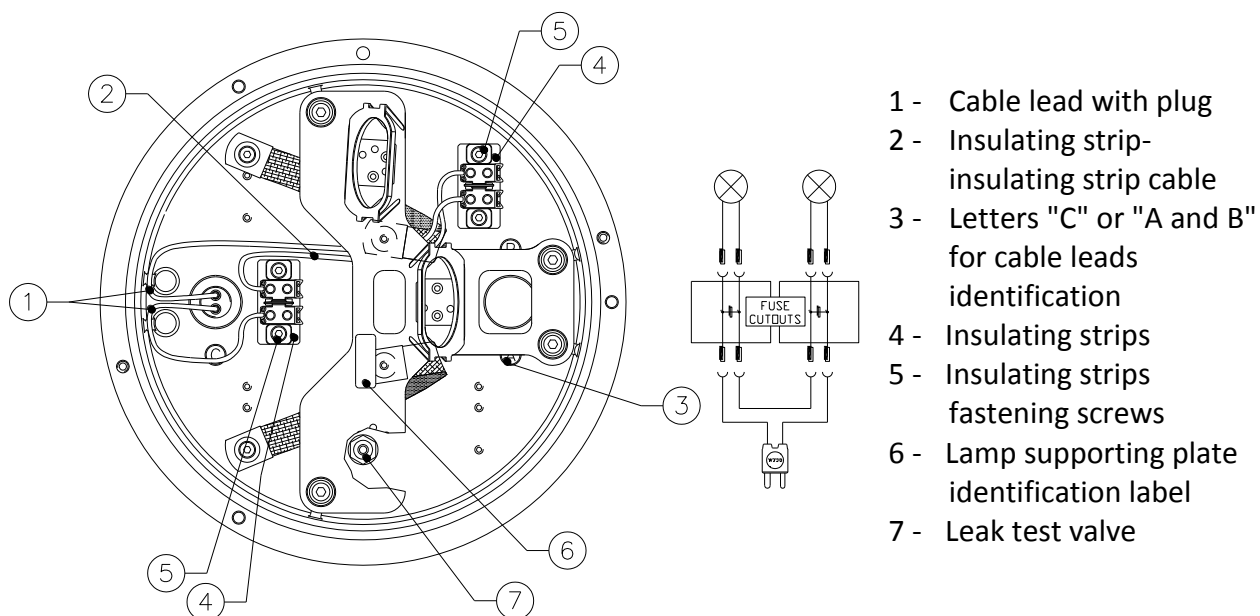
Lower cover with one cable lead and optional fuse cutout – Inside view
